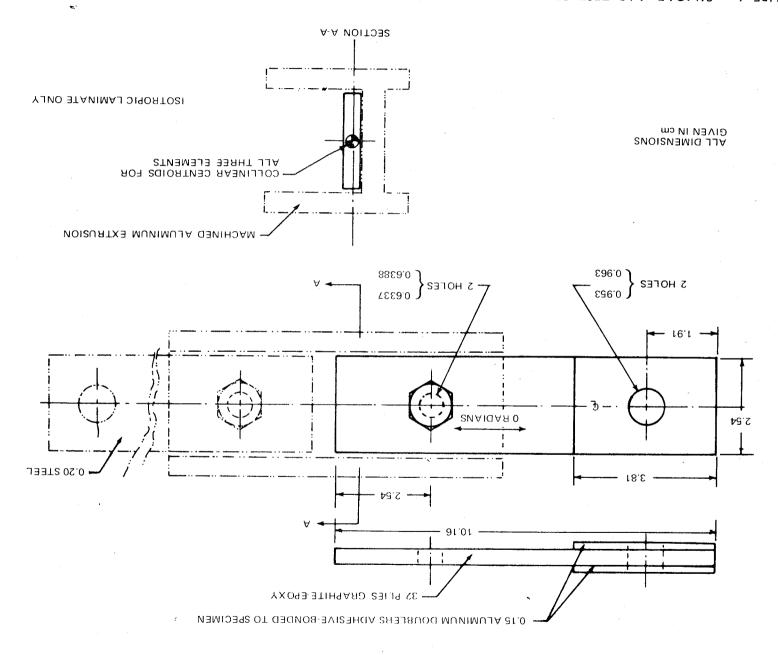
SINGLE-LAP TEST SPECIMEN AND MINIMIZED ECCENTRICITY TEST SET-UP (TENSILE LOADING)
